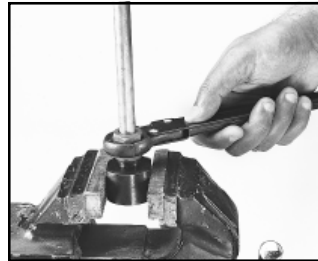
Hold tube steady against internal shoulder of Ferulset Tool or fitting body and tighten nut an additional 1 3/4 turns.
